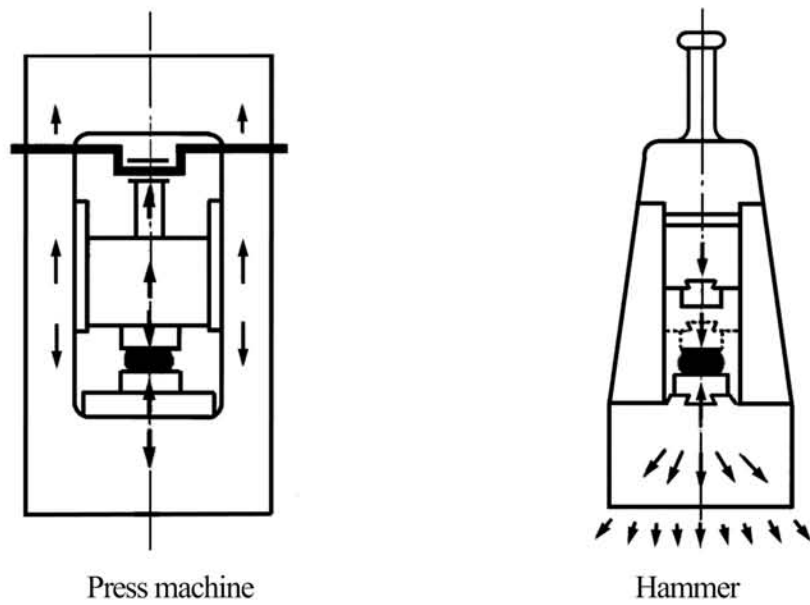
Press machine and hammer¹⁻²⁸⁾
